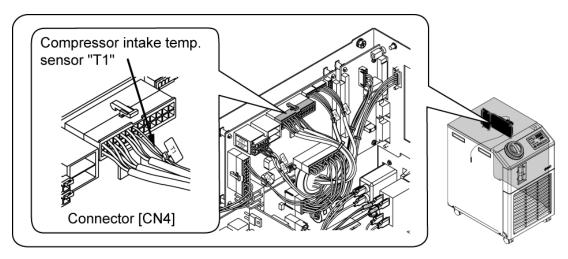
Check the connection of the compressor intake temperature sensor
